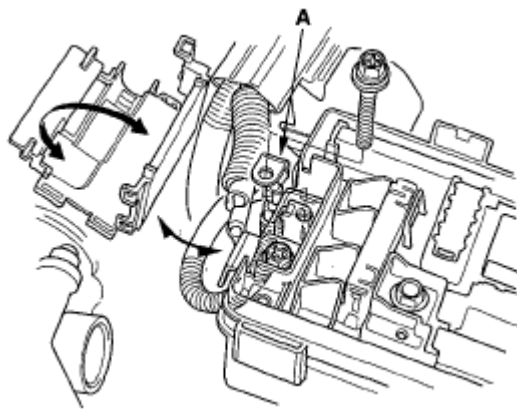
Identifying Alternator Cable And Main Under-Hood Fuse Box
